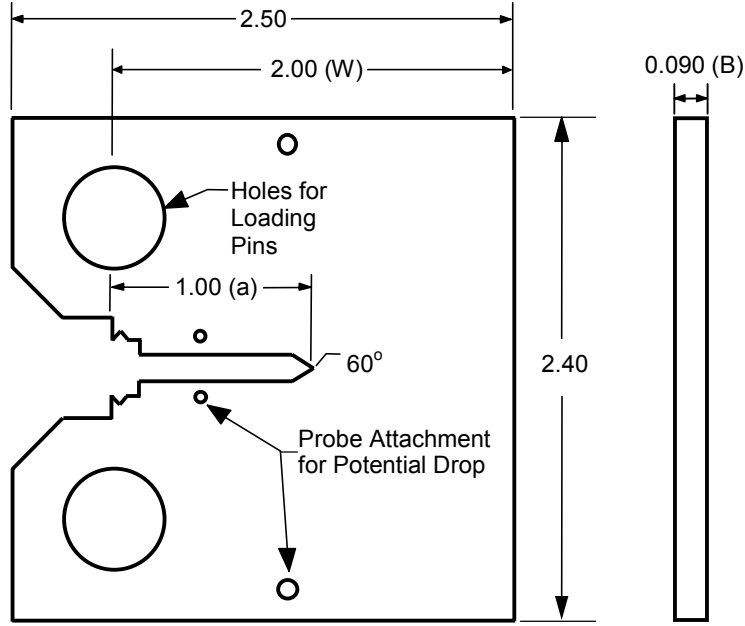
Fracture mechanics compact tension specimen geometry (dimensions in inches).
